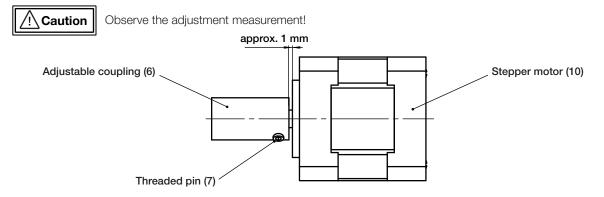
Adjustable coupling to stepper motor flange adjustment measurement
